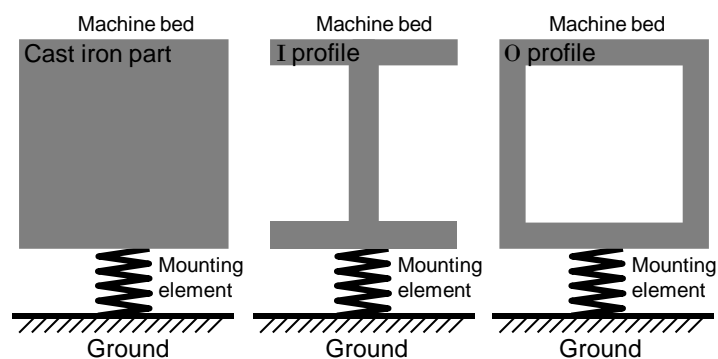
Three illustrative examples of mounting elements between ground and machine bed.
